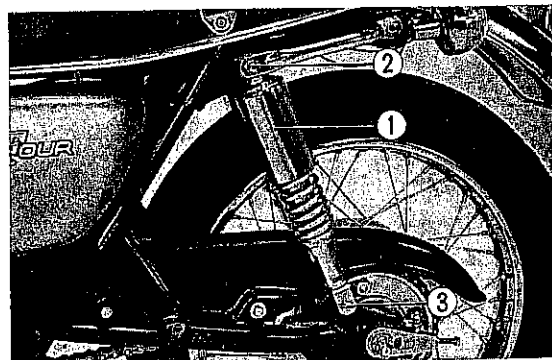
① Rear suspension ② Nut ③ Bolt
